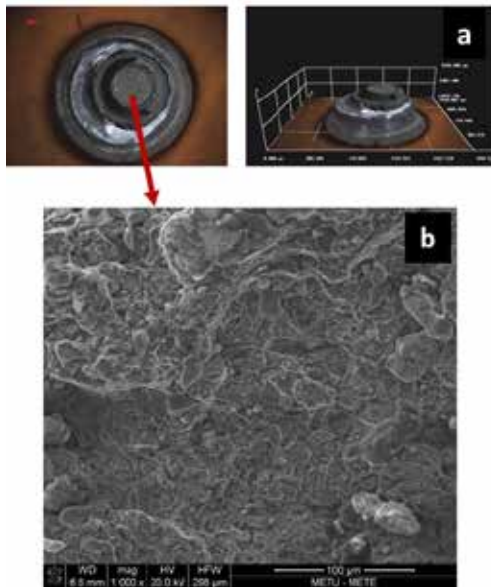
a. Optical microscopy image of fractured rivet surface b. Scanning electron microscopy image of fractured rivet surface
